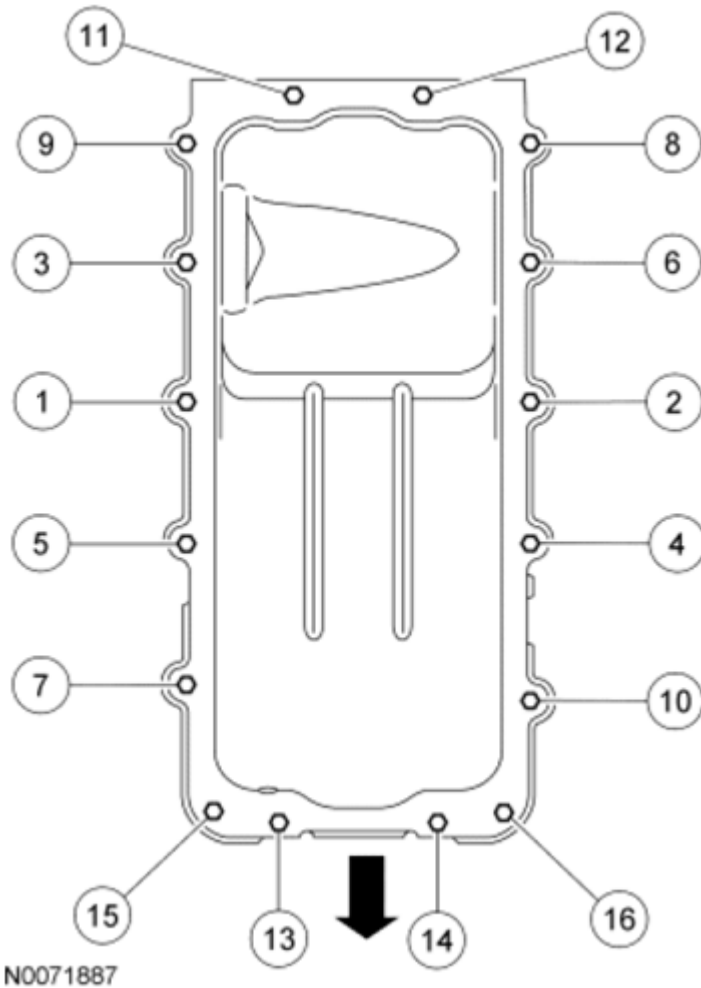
Identifying Oil Pan Bolts Removal/Installing Sequence
